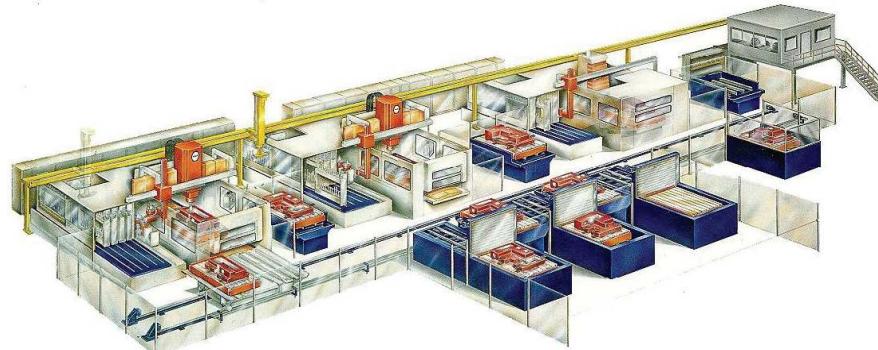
Example of a Flexible manufacturing layout having multiple machining cells
